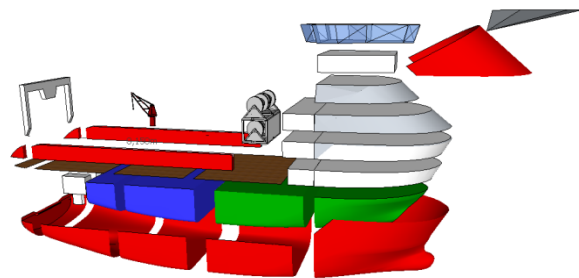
Exploded view (2m spacing in x- and z-direction)
